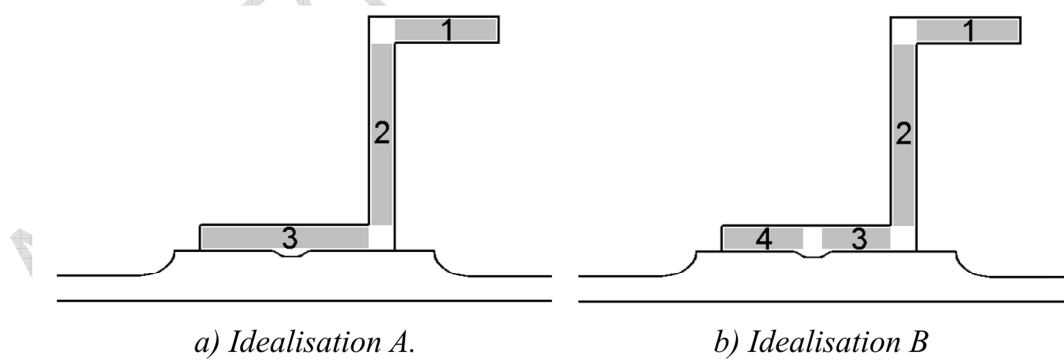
Joint idealisation (Friction stir welding).
